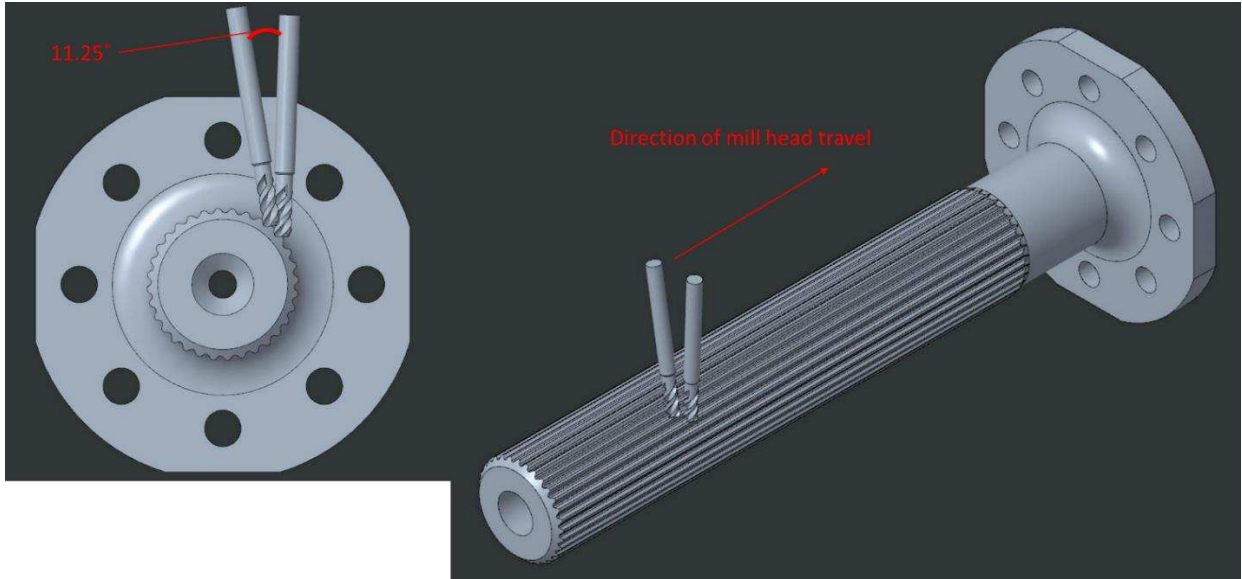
Part G external spline manufacturing method on 4-axis CNC mill
